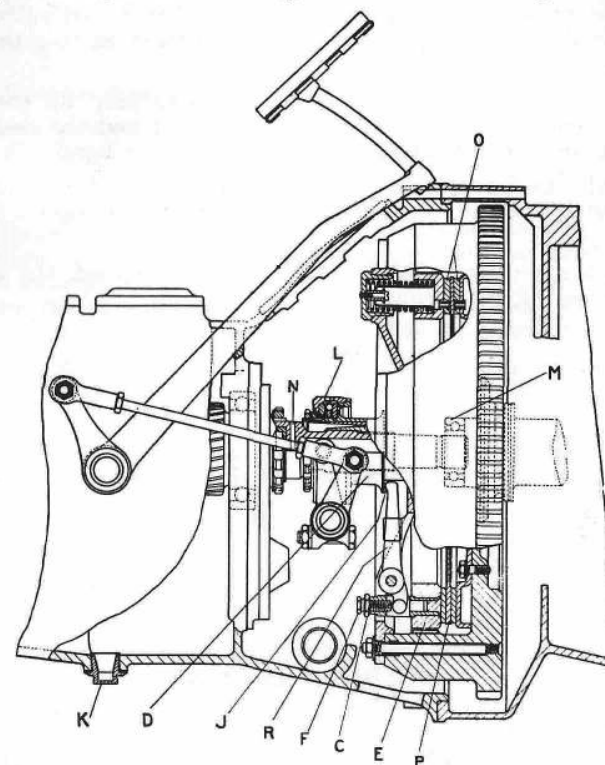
PART SECTIONAL VIEW OF CLUTCH.
